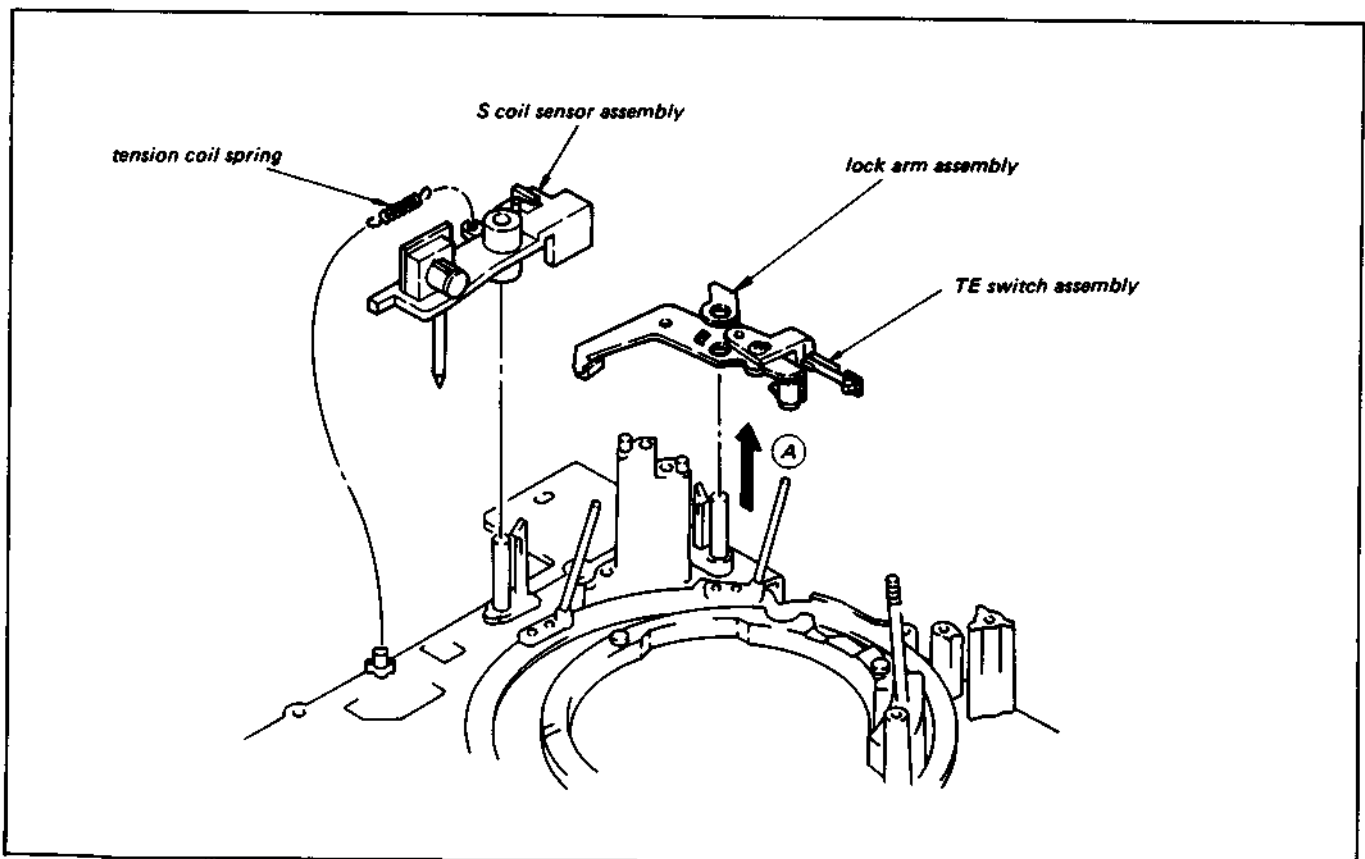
Removal of the TE switch assembly and lock arm assembly
